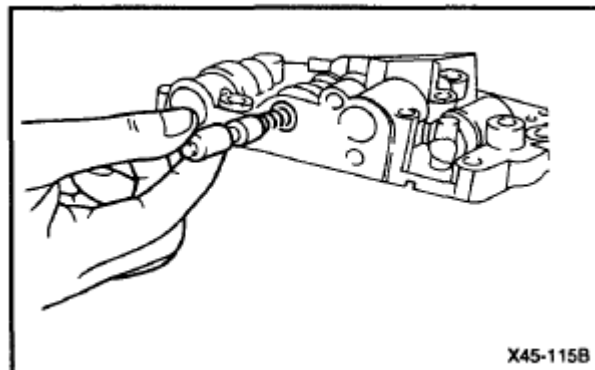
Removing Shift-Control Valve & High-Low Pressure Valve
